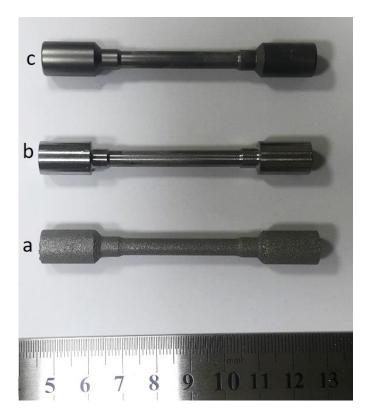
The parts were prepared for surface roughness and mechanical properties. 11.a. The part after manufacturing, 11.b. The part after lathe/turning operation, 11.c. The part after lathe/turning and sand-blasting operation
